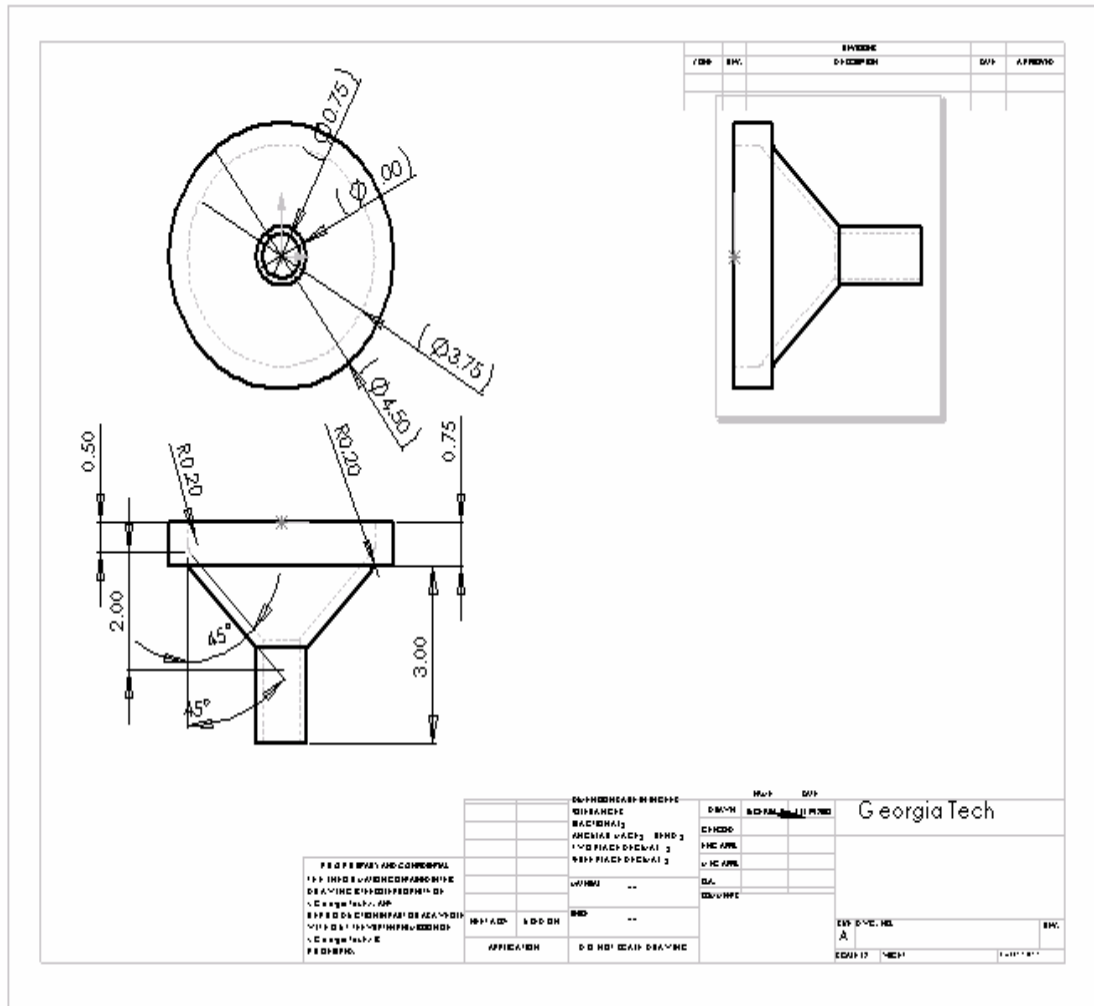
Drawing of the pump head of the organ culture system. All dimensions are in inches.
